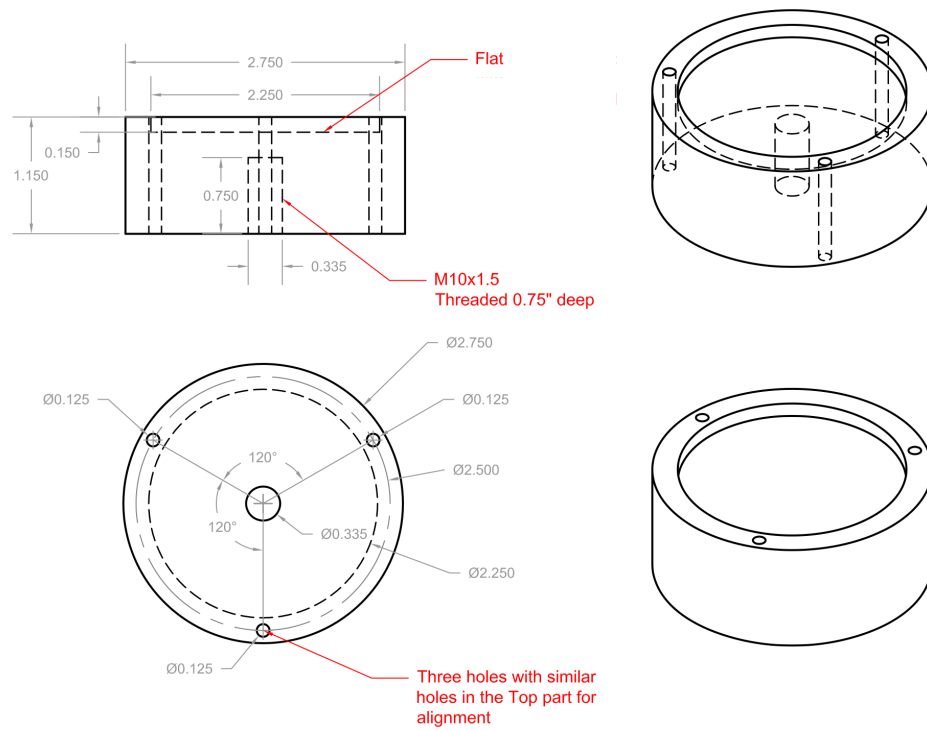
Stainless-Steel Mold. Bottom piece of the poker chip mold (all dimensions in inches)
